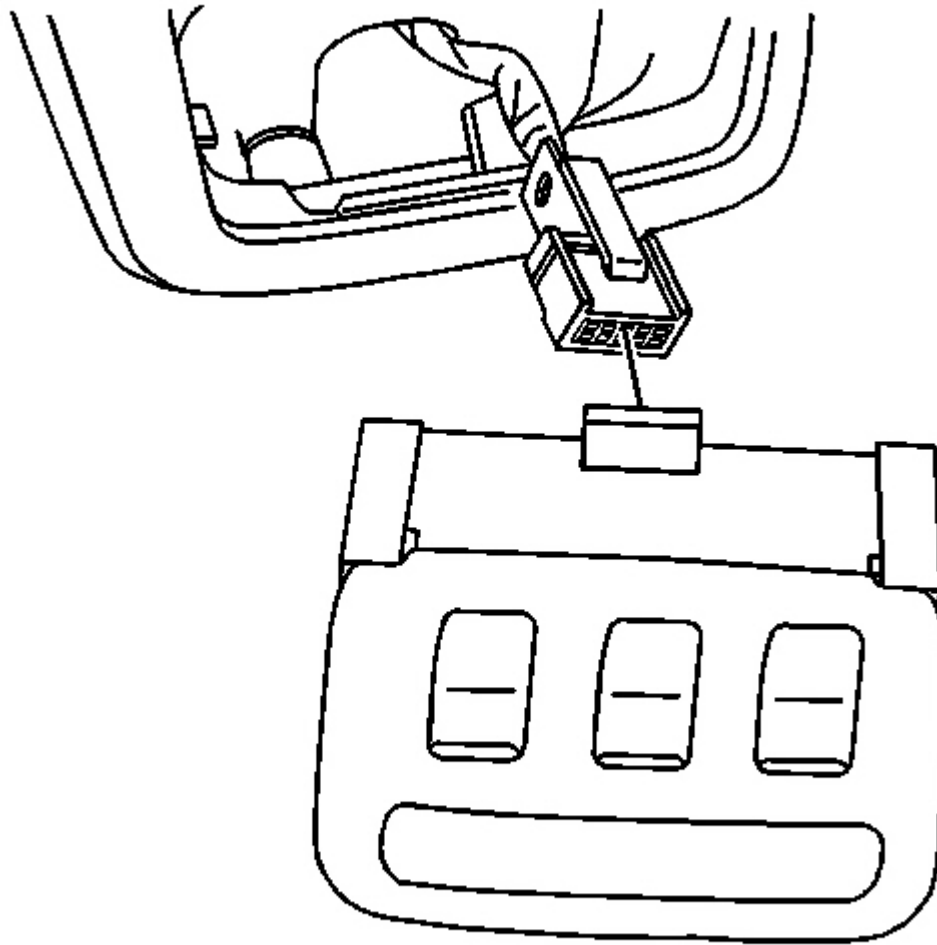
View Of HVAC Control-Auxiliary Electrical Connector
